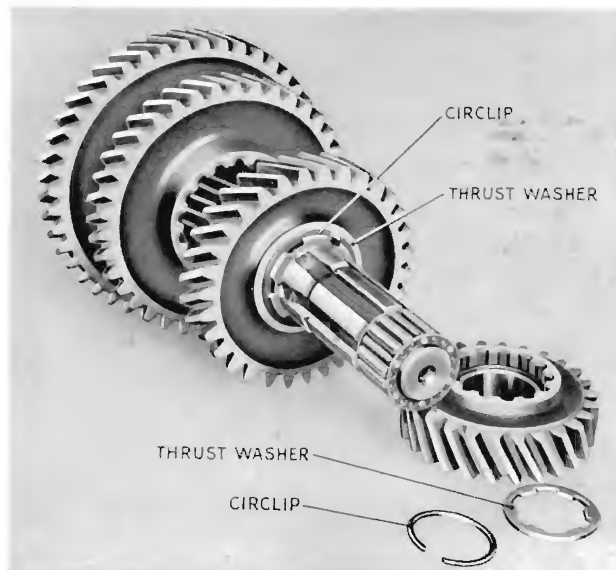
METHOD OF SECURING MAINSHAFT GEARS.
